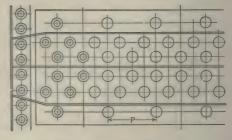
Butt and Double Strap Joint, Triple-riveted.
